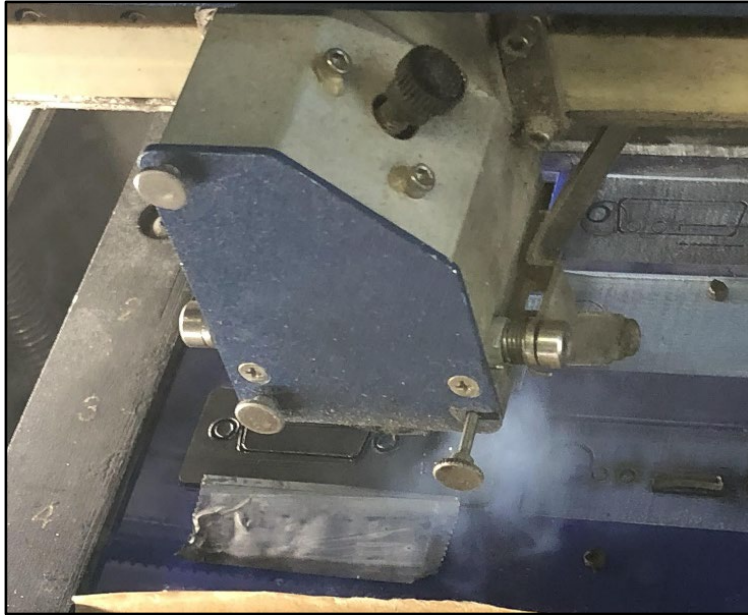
Laser cutter manufacturing for the CAN Logger 3 enclosure
